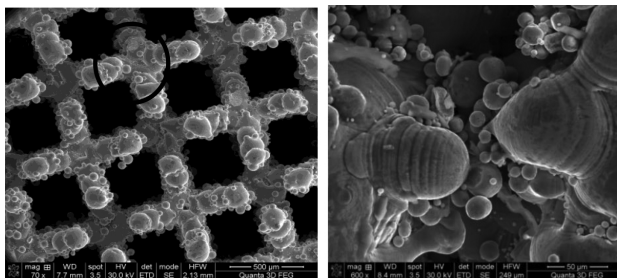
Samples manufactured using the MCP Realizer II SLM 250 equipment [26].
